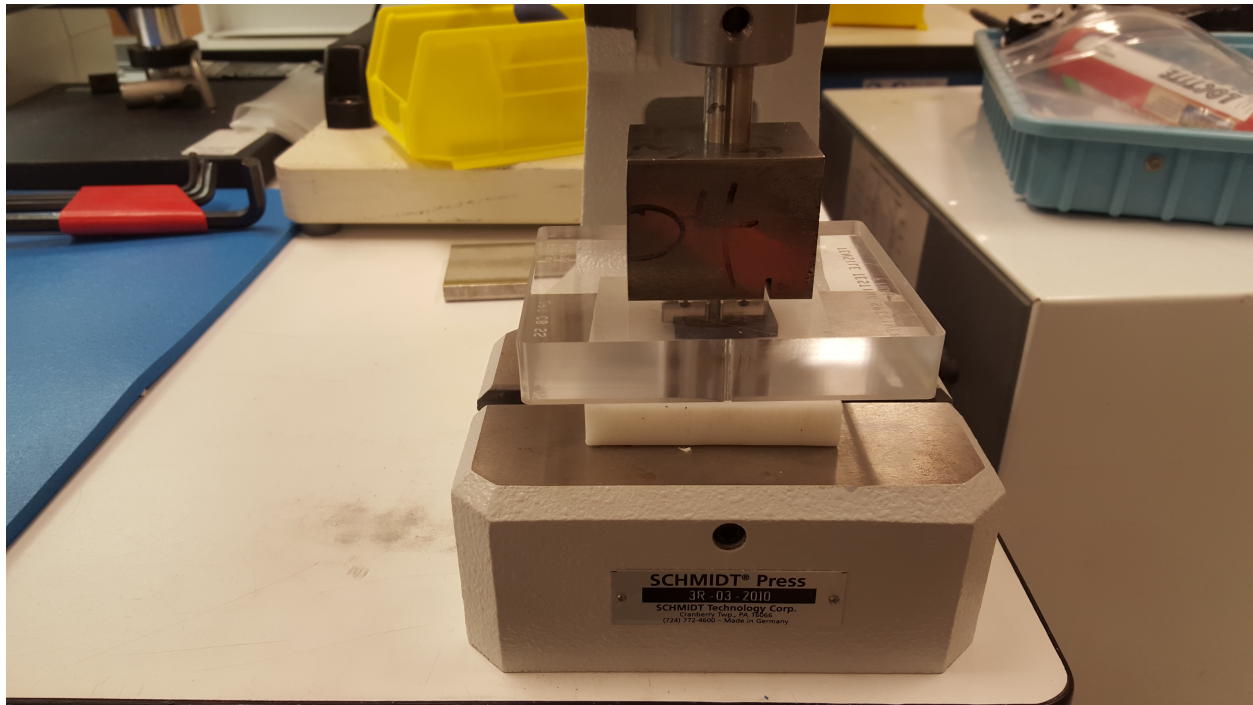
Unrolled coupons (rectangles) were placed on a silicone rubber sheet using double sided tape between each coupon layer and between the first coupon and the rubber sheet.
